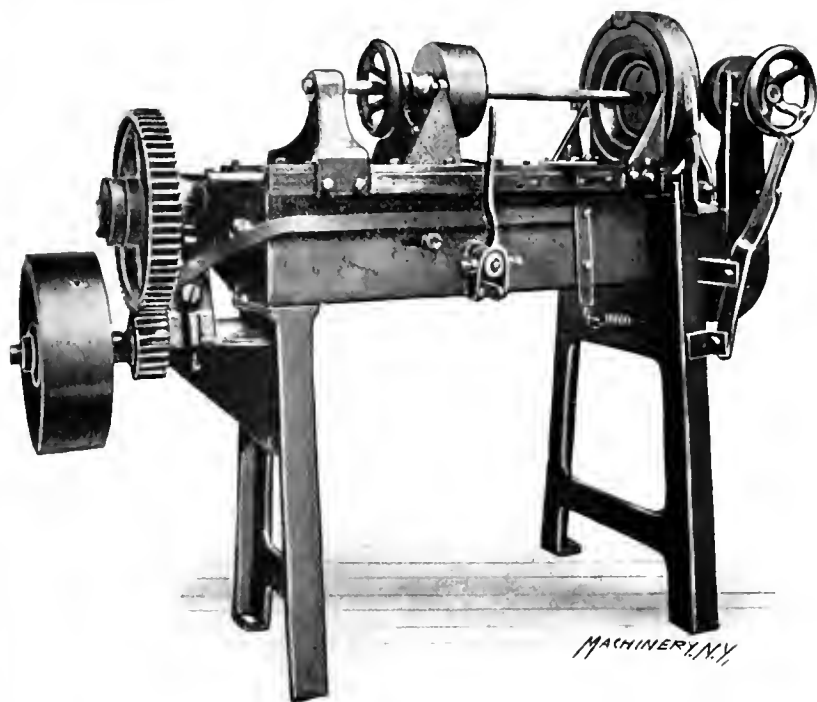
A Machine for Forming Ribbed Stove pipe Elbows by the Rolling Process.
